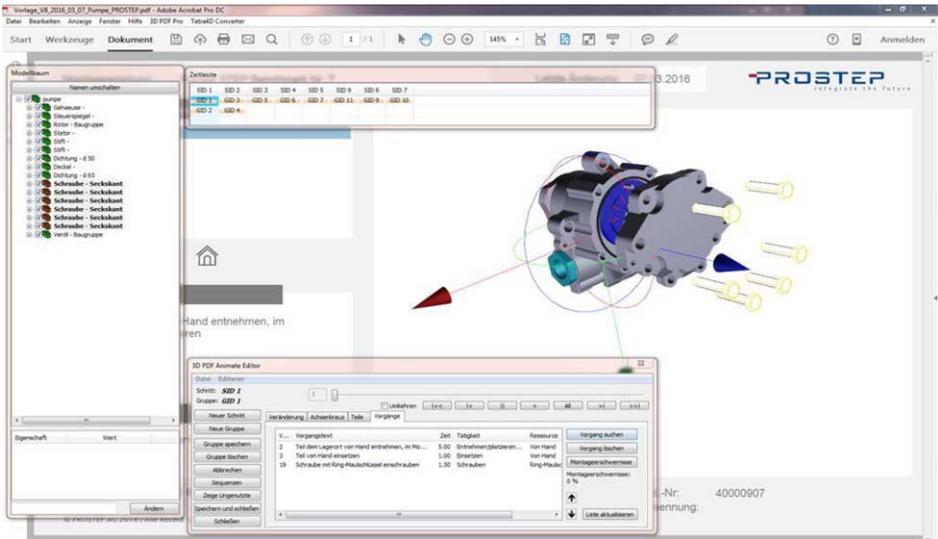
Authoring and assembly planning tool 3D PDF Pro.
